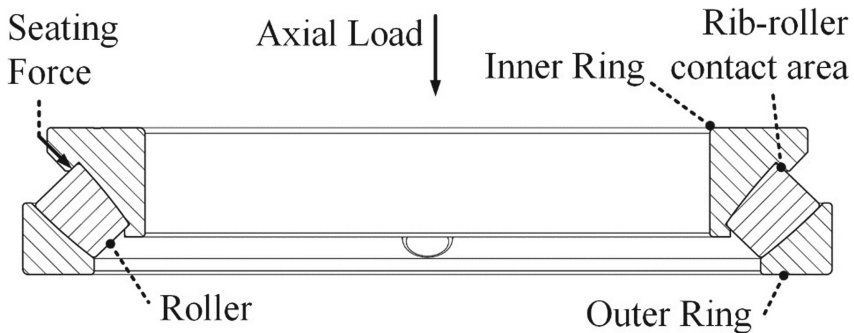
Schematic drawing of an axial spherical tapered roller bearing
